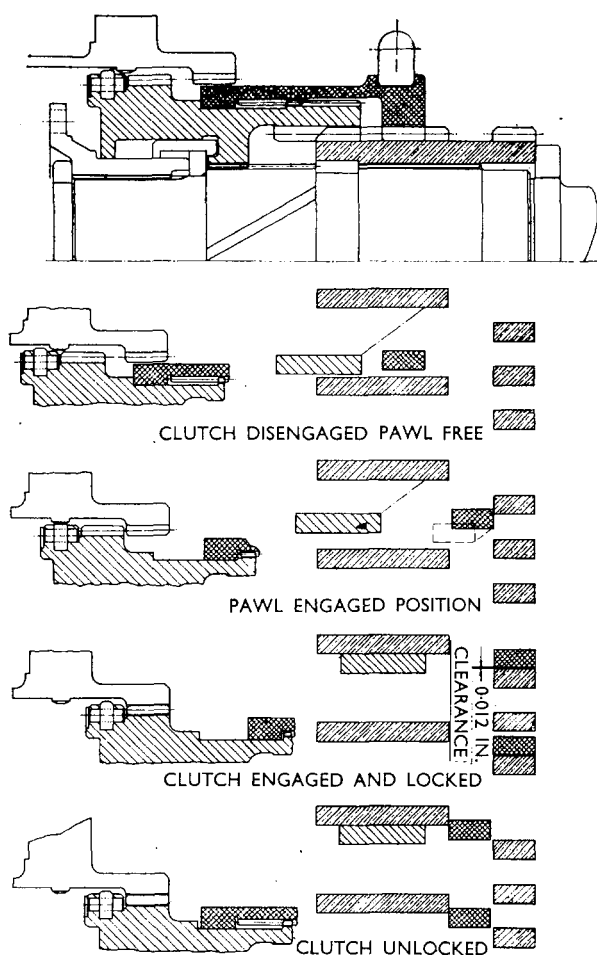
Y.102A—ASSEMBLY OF MAIN SYNCHRONIZING CLUTCH—PORT. POSITIONS OF VARIOUS PARTS DURING ENGAGEMENT AND DISENGAGEMENT
